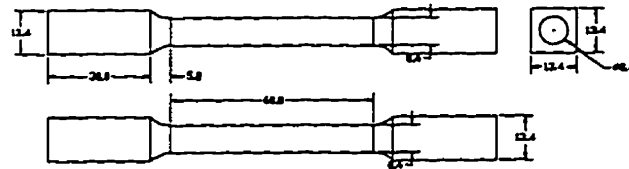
Dimension of tensile test specimens for 8.4 mm thickness pipe.
